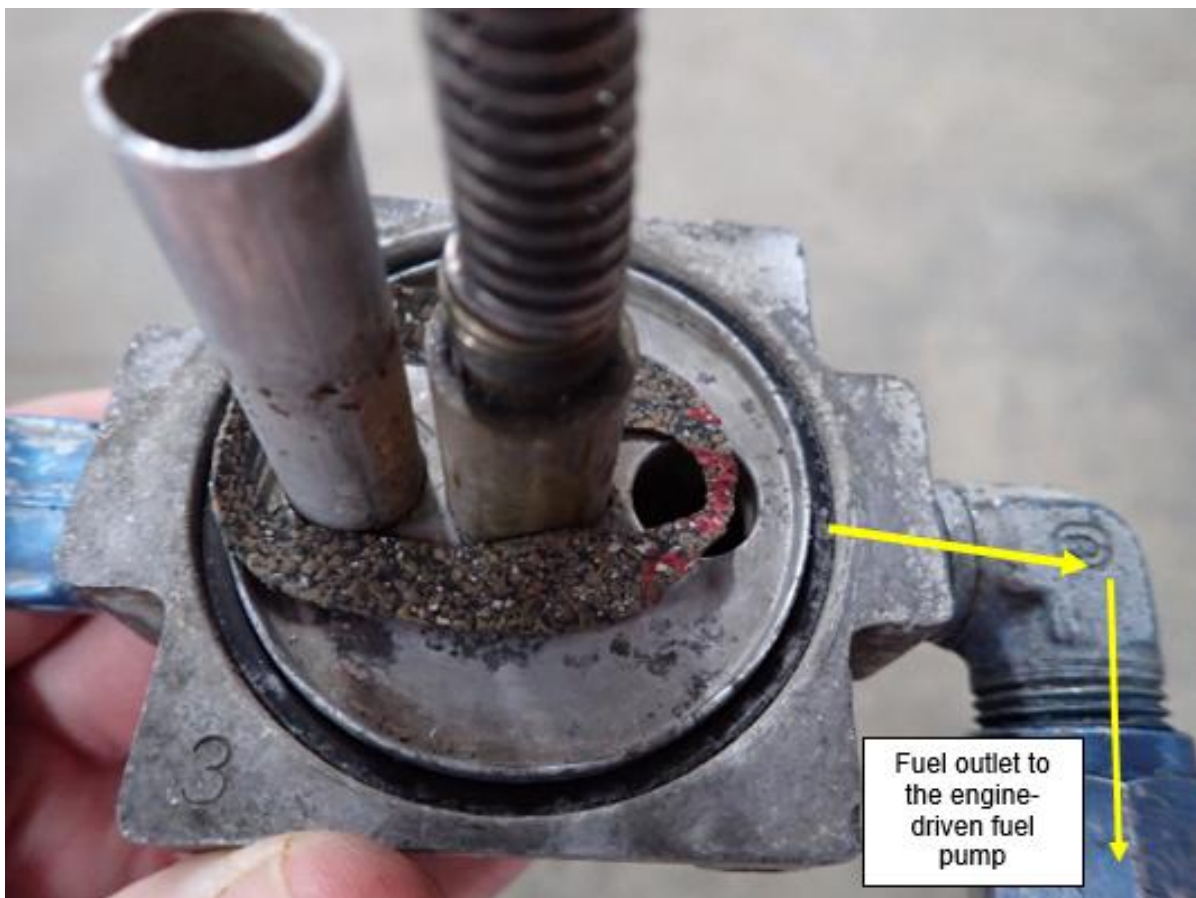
Removed fuel filter assembly shows the gasket restriction to the hole that feeds fuel to the engine-driven fuel pump. NOTE: *The unit is upside-down for illustration purposes.
